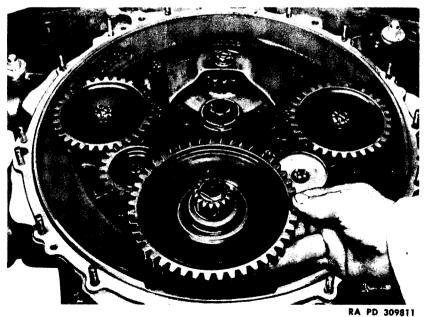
Removing Cranking Motor Drive Gear and Cam Drive Pinion
